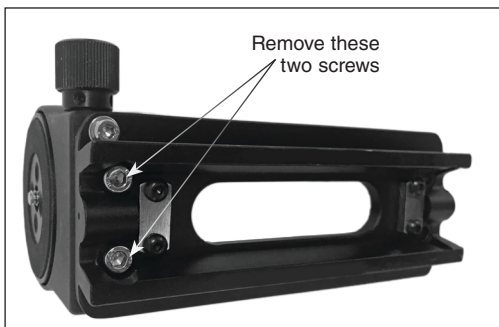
Remove the two socket head cap screws indicated with a 5mm Allen wrench to remove the declination platform.
